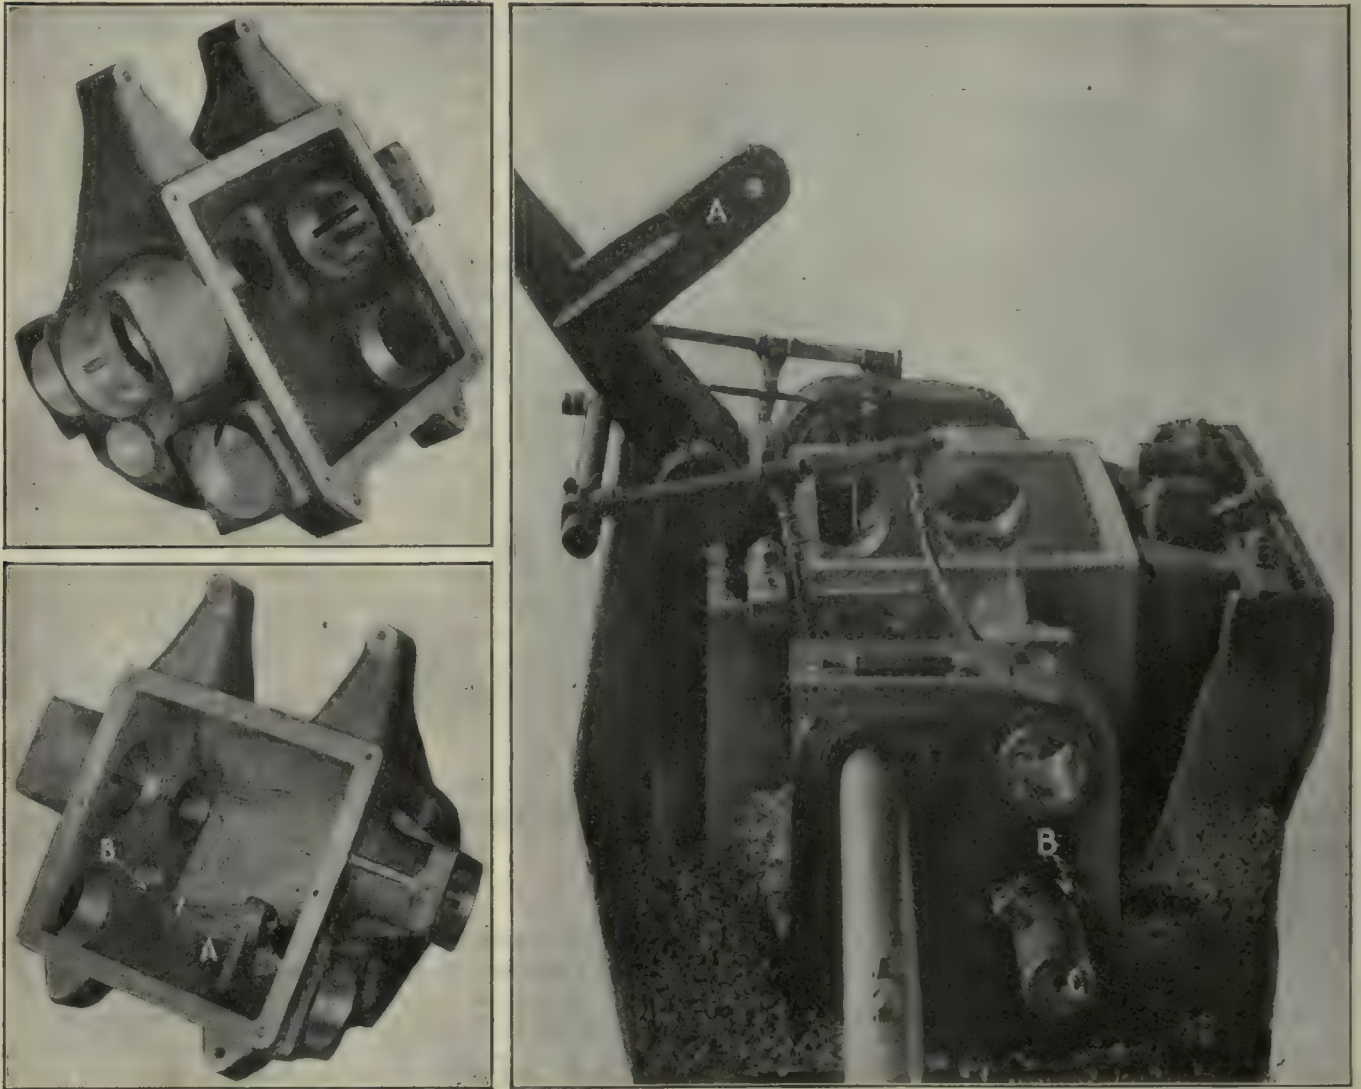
THE FIXTURE FOR MEASURING COUNTER-BORED HOLES
